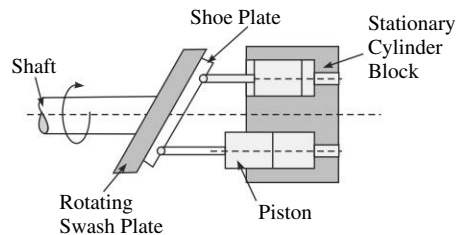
Fixed-cylinder block and rotating swash plate
